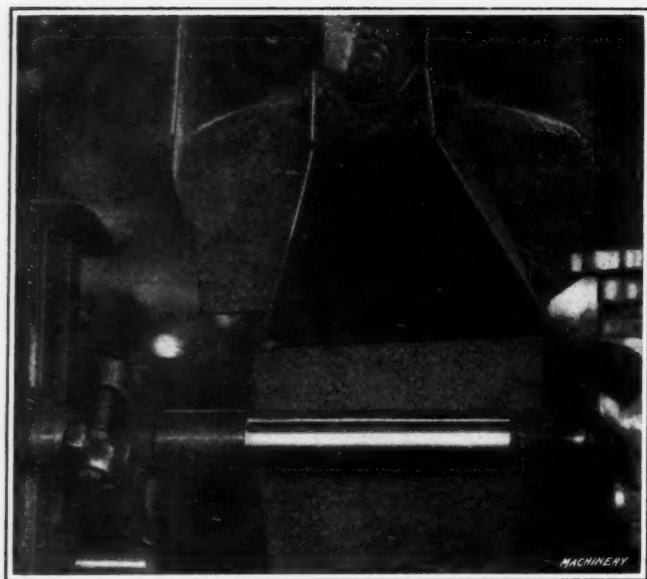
Set-up for grinding Transmission Countershaft in Norton Plain Grinding Machine
